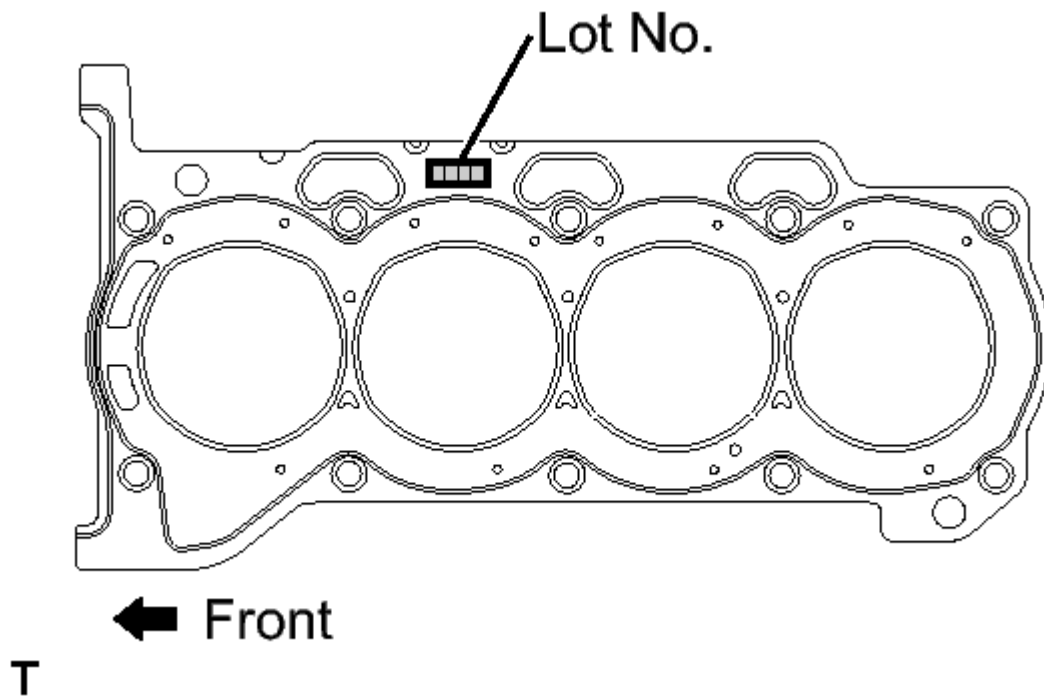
Identifying Cylinder Head Gasket Lot No. Stamp
